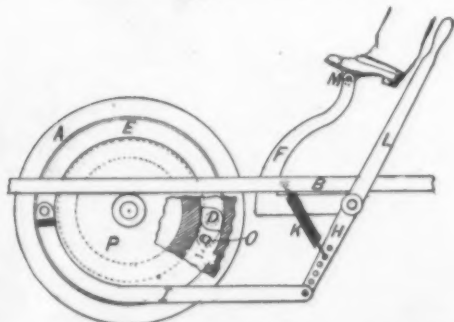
SIDE VIEW OF WILKINSON STARTER AS USED ON THE HOLMES CAR.
